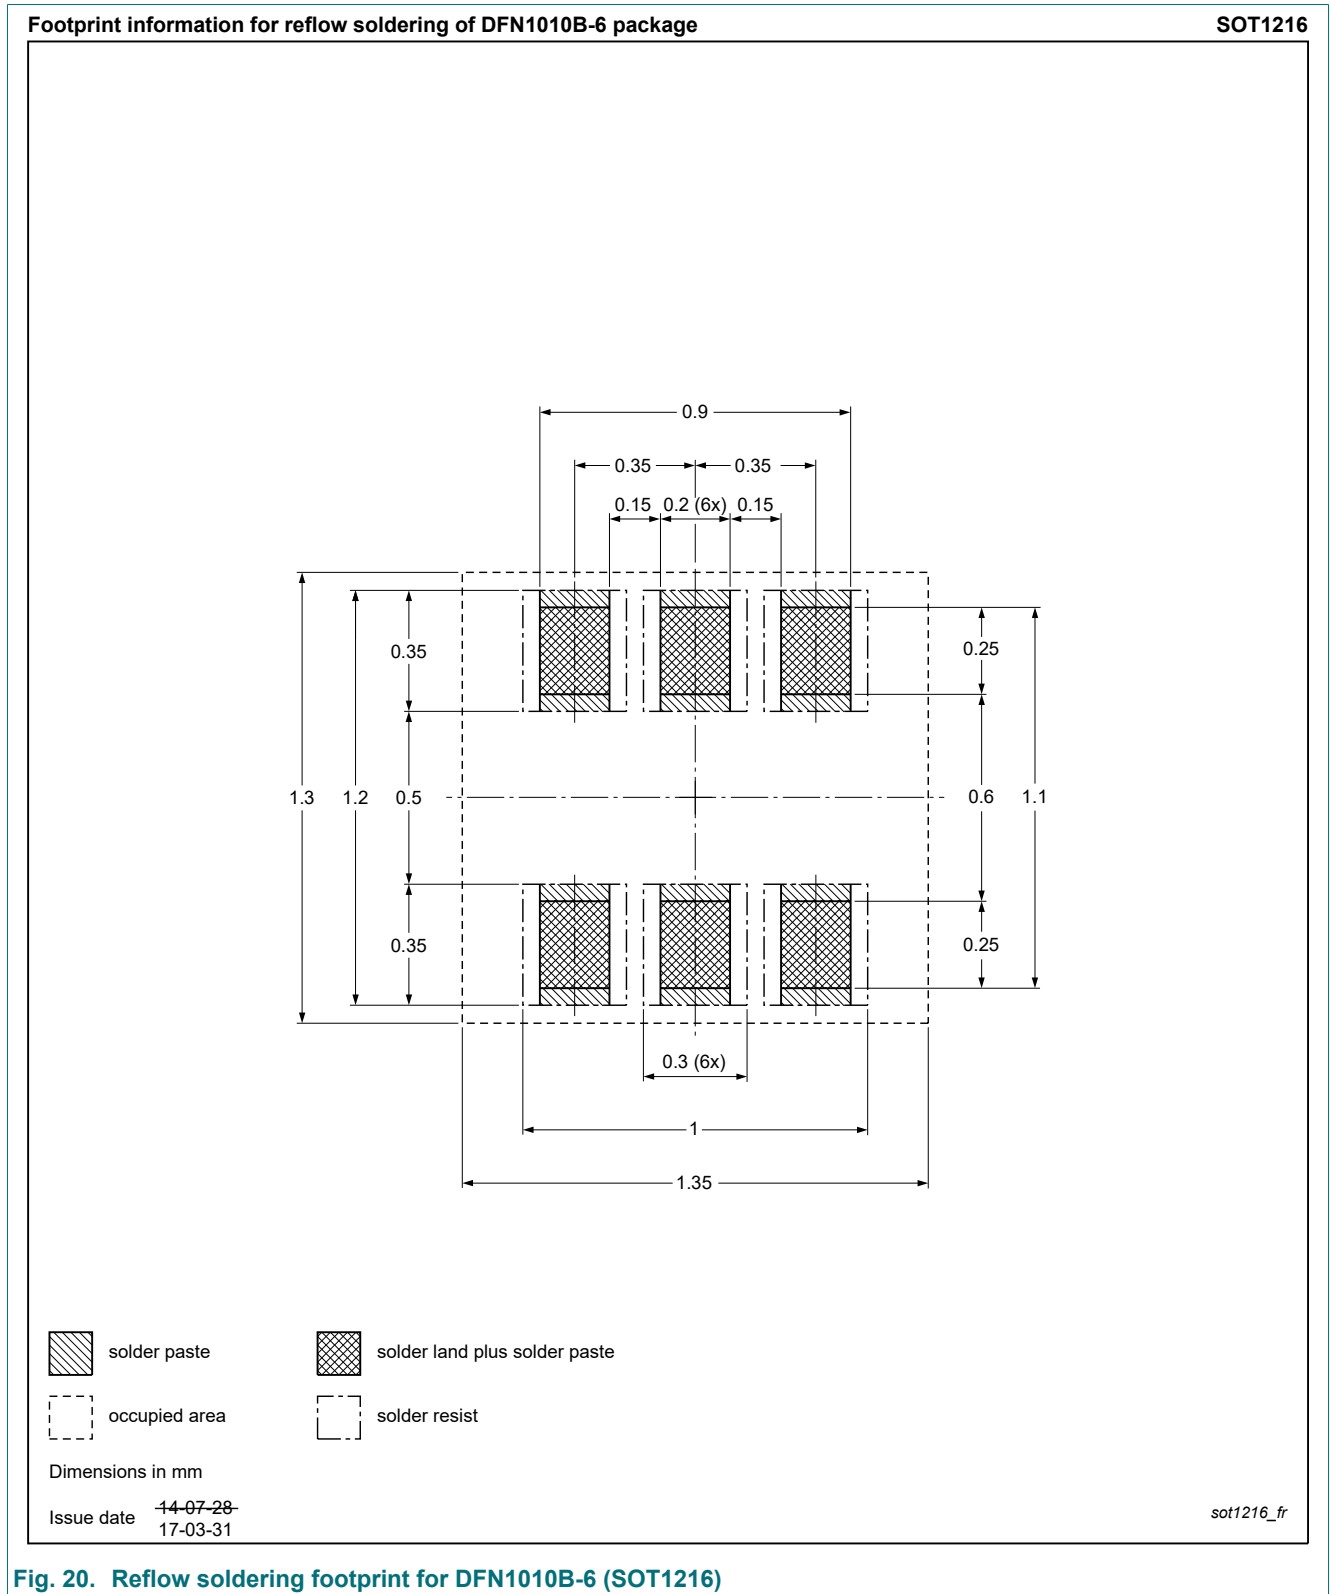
Reflow soldering footprint for DFN1010B-6 (SOT1216)
